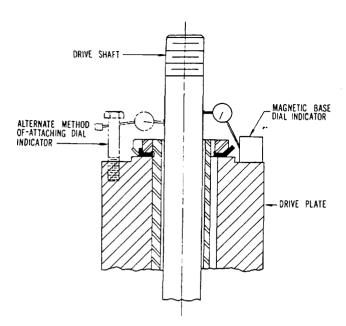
DIAL INDICATOR SETUP FOR ALIGN-ING DRIVER TO PUMP CENTERLINE
